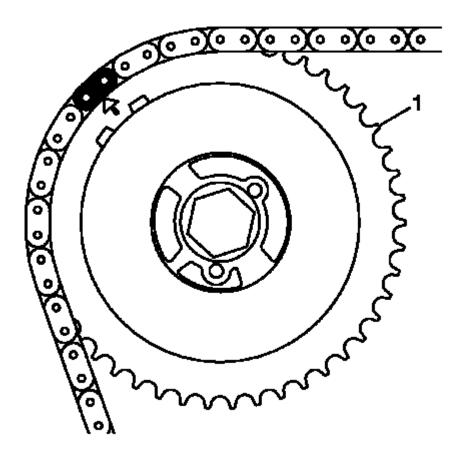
Exhaust Camshaft Actuator Courtesy of GENERAL MOTORS COMPANY
